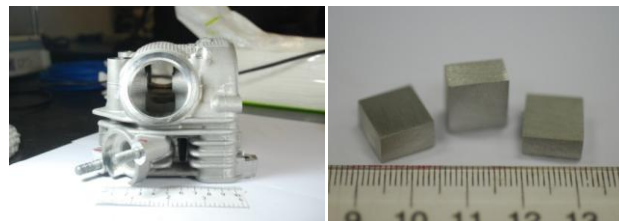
(left) Cylinder head of motorcycle, and (right) sample specimens.
